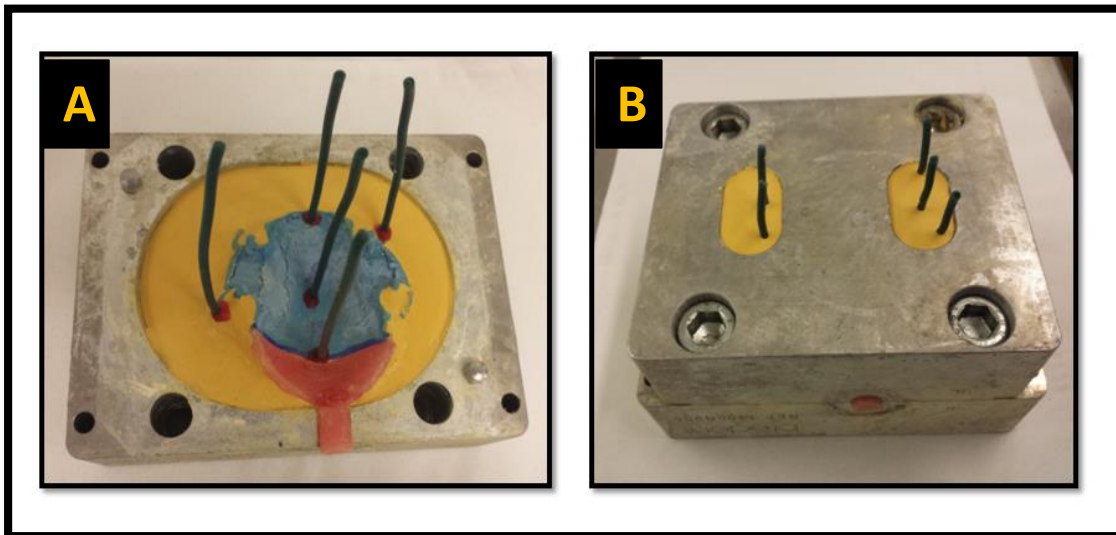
Flasking the RPD framework by attachment of 2.5 mm sprue wax to produce the channels for the thermocouple sensors: A. before moulding the upper half of the flask; B. after moulding the upper half of the flask
